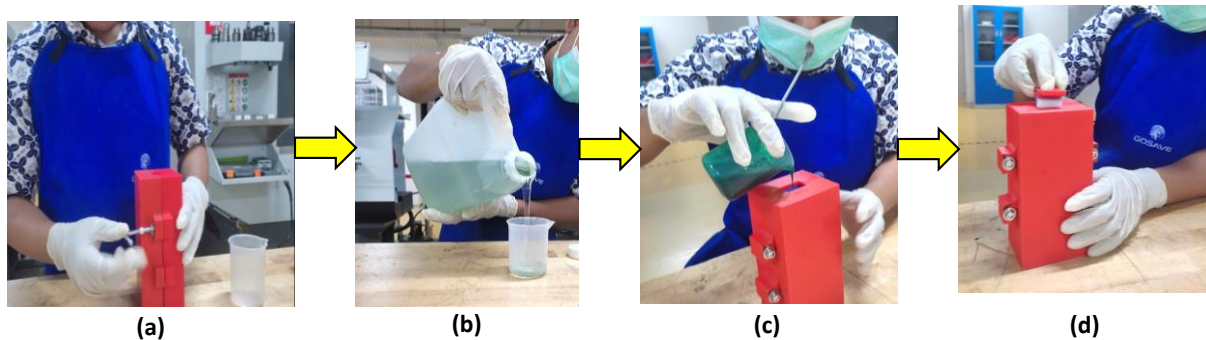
Steps in performing casting of the silicone mold, (a) tightening the master casing with the master mold inside, (b) making a silicone liquid, (c) pouring the silicone liquid into the master mold, (d) closing the master mold.
